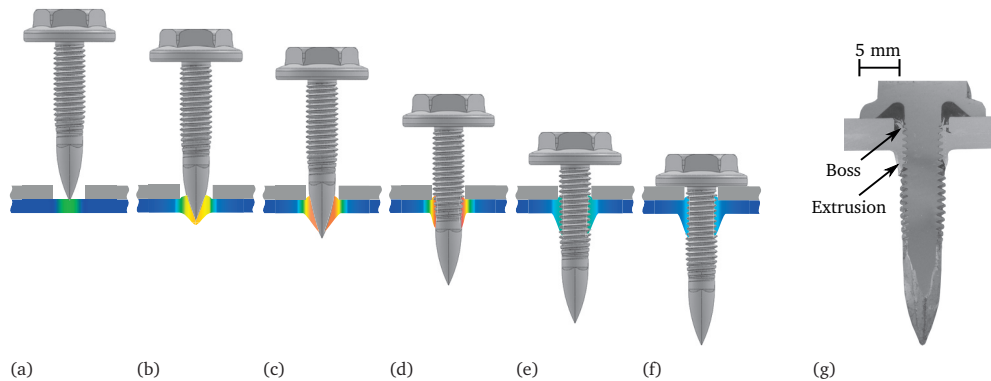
The FDS process. (a) Heating. (b) Penetration. (c) Extrusion forming. (d) Thread forming. (e) Screw driving. (f) Tightening. A picture of an FDS connection is shown in (g), with the boss and extrusion indicated.
